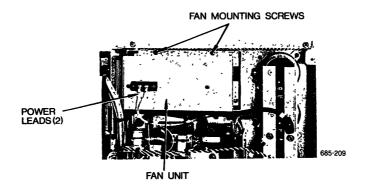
Cooling Fan Assembly of Model CIMR-18.5D, 200 V, 25 kVA
